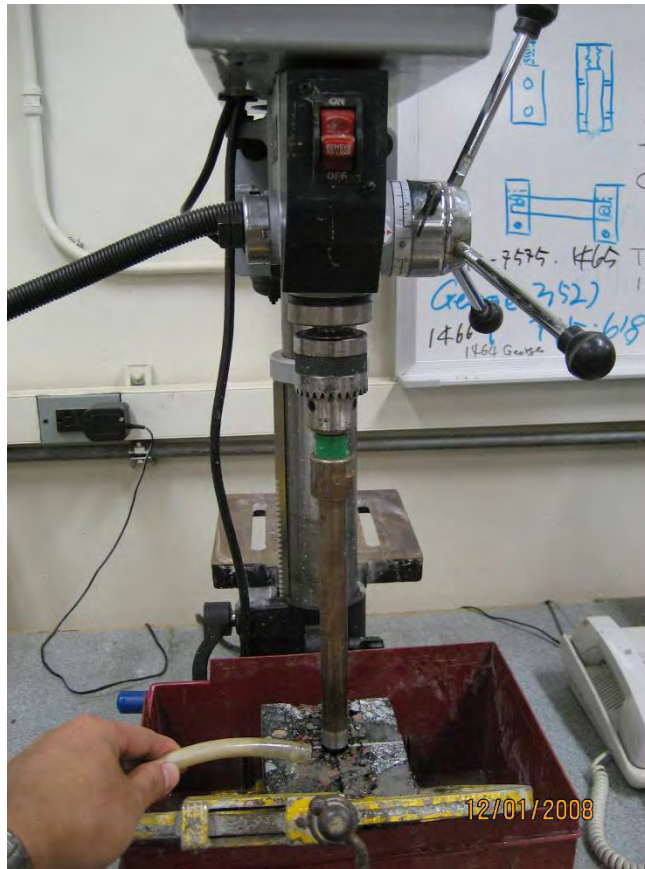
Composite Specimen Stress Concentrator Drilling Setup
